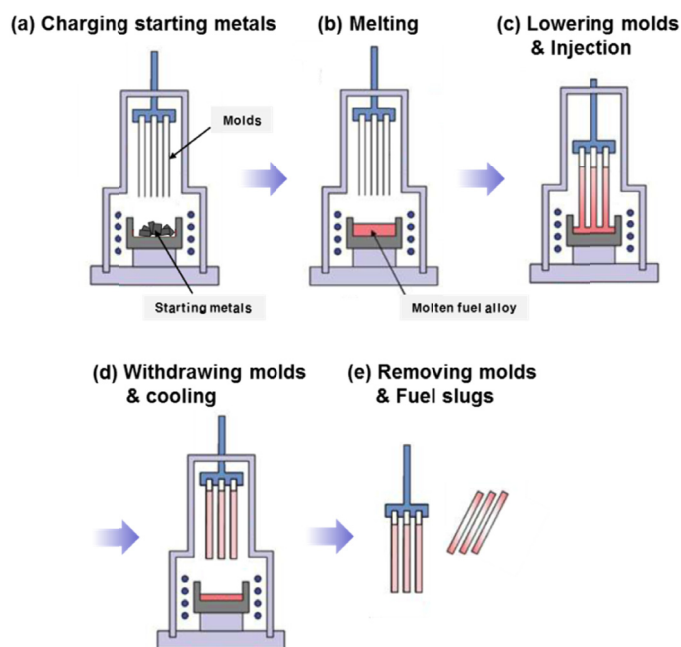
Schematic diagram of the metallic fuel slugs fabrication process by the modified injection casting method
